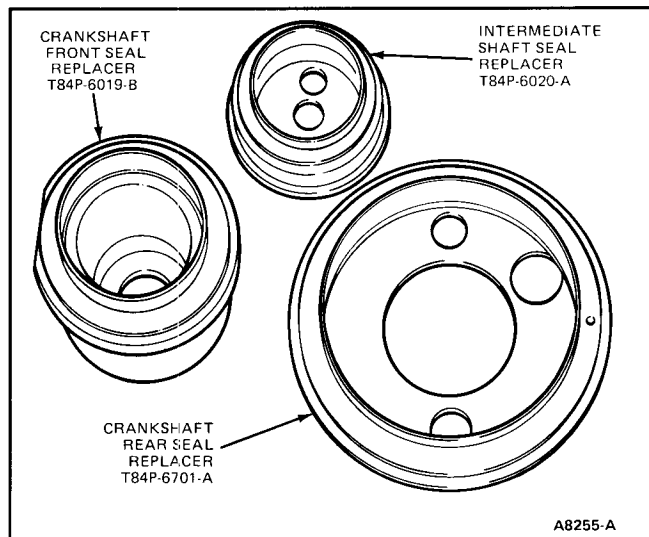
Crankshaft—Front and Rear, and Intermediate Shaft Seals Installation Tools
